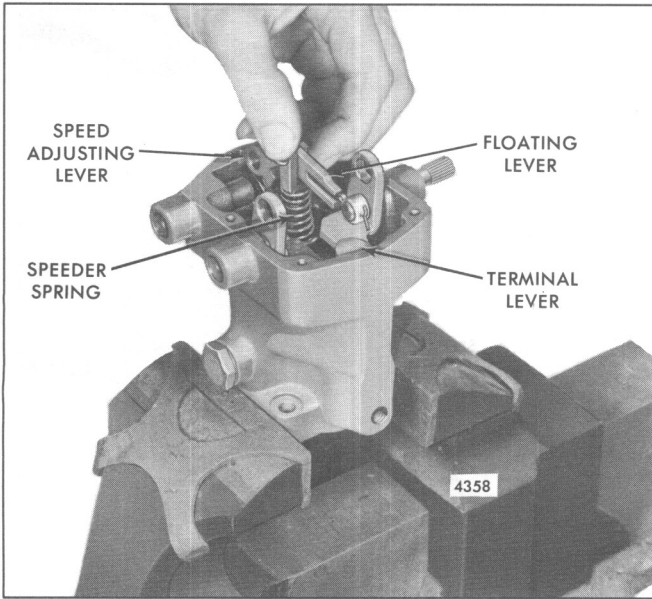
Removing Speed Adjusting Lever, Spring Fork, Speeder Spring and Pilot Valve Plunger Assembly
